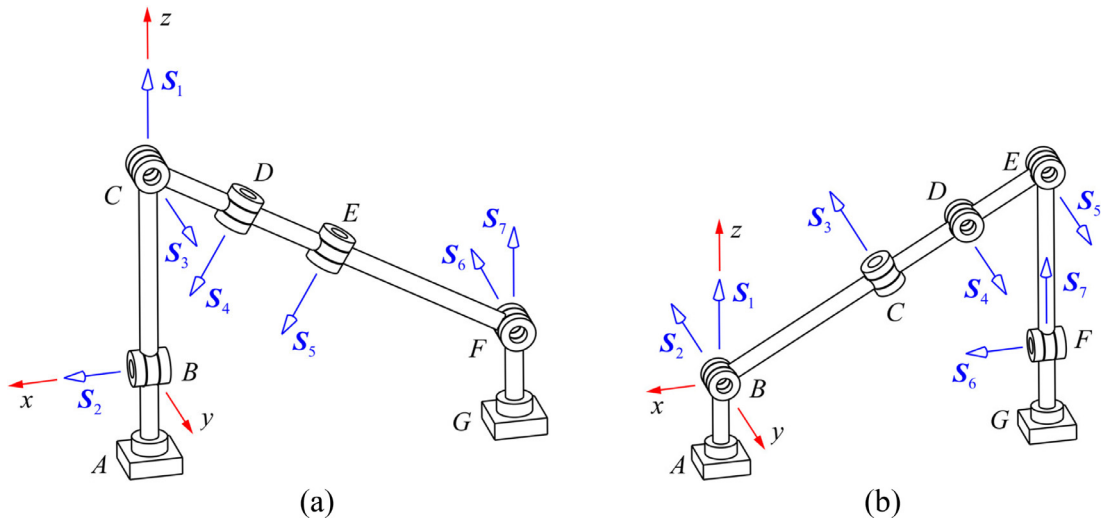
Singular configuration I (a) and singular configuration II (b) of another Schatz-inspired metamorphic mechanism.
